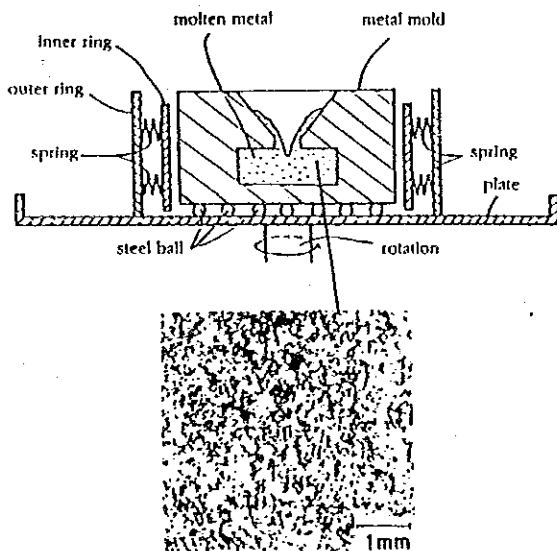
Eccentric rotating machine for grain-refining during solidification⁴⁾
